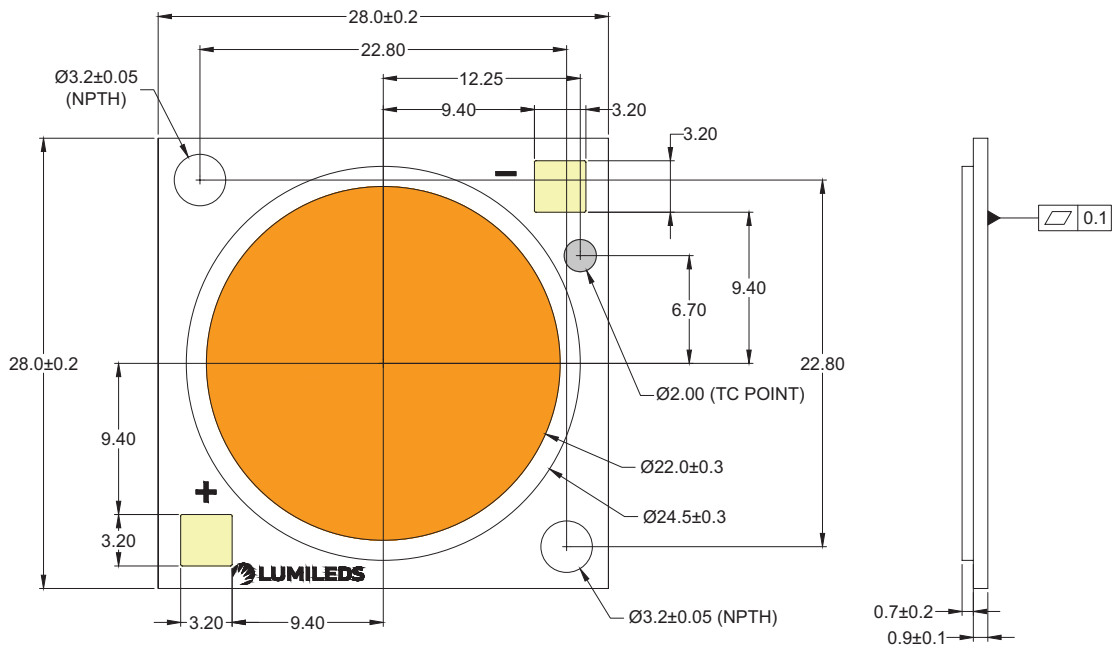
Mechanical dimensions for L2C6-xxxxxL11x2200, L2C6-xxxxxL13x2200, L2C6-xxxxxL16x2200, L2C6-xxxxxR12x2200 and L2C6-xxxxxR18x2200
